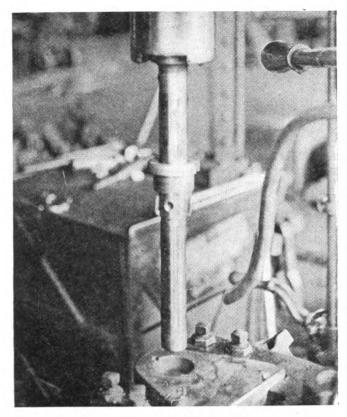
Special boring jig used in reclaiming brake beam struts with worn live truck lever holes
